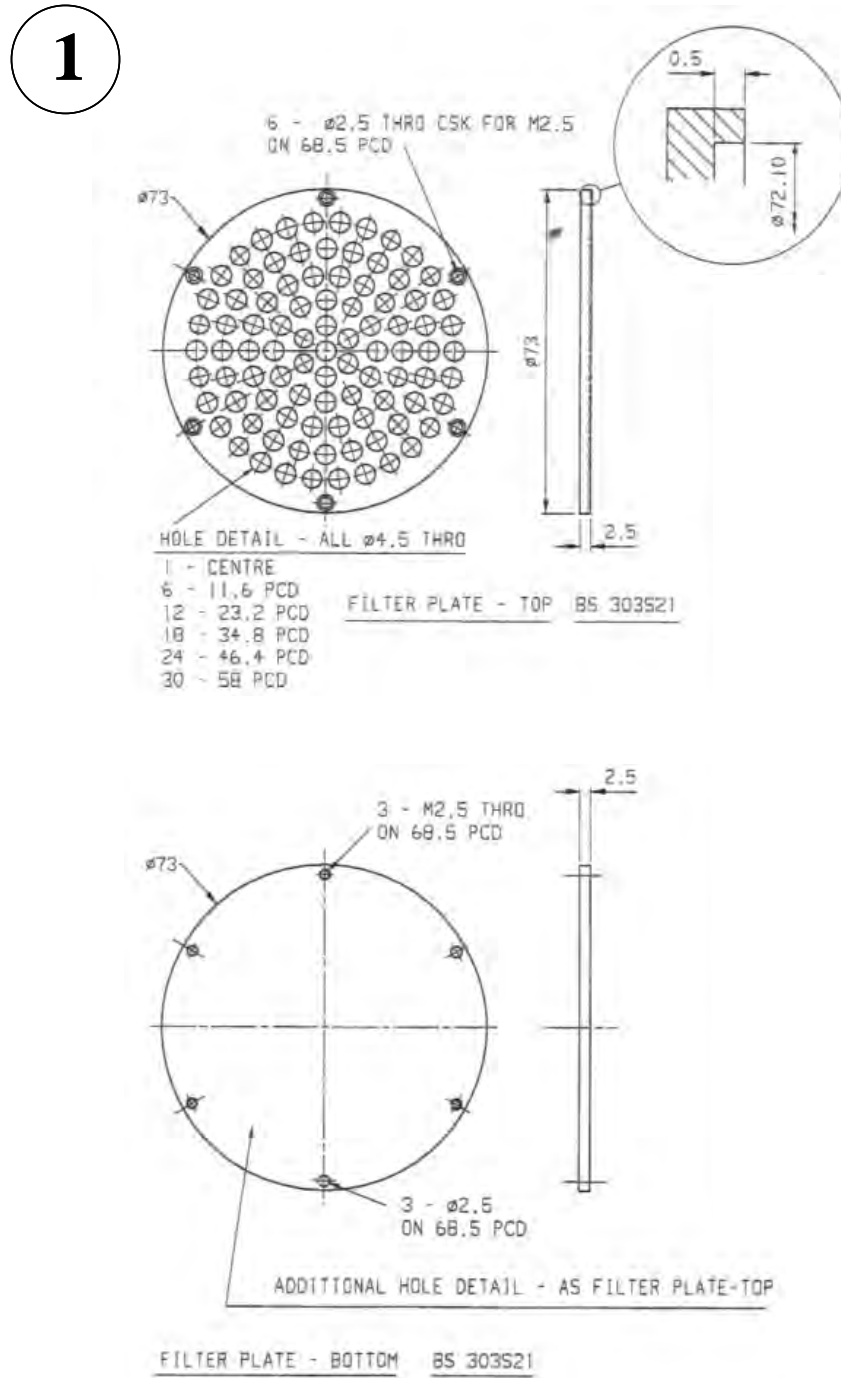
Perforated stainless steel plates used to sandwich ceramic filter.
